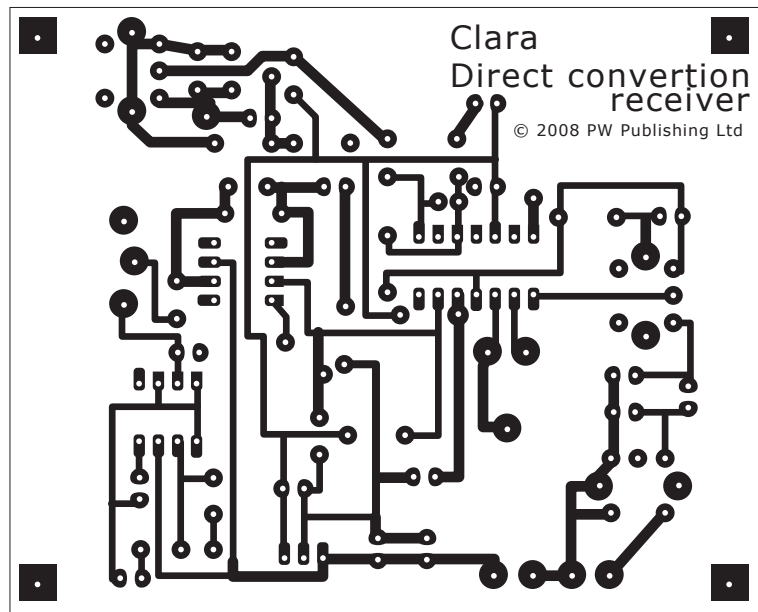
The original p.c.b. layout for the Clara receiver used a larger than necessary double-sided board.
